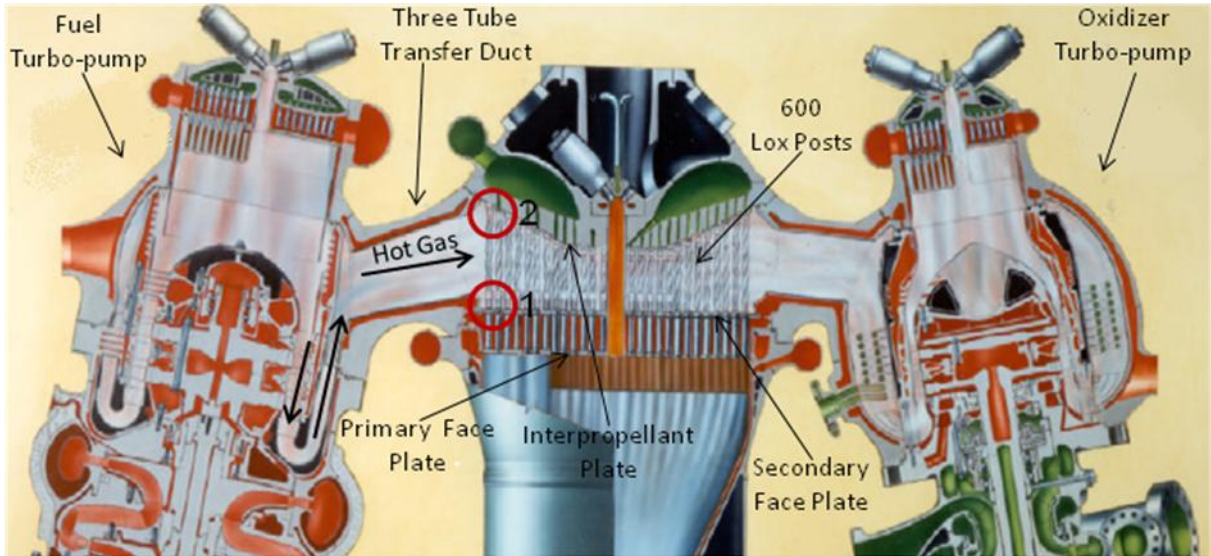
Power Head, Main Injector, and Turbo-pump Assemblies
